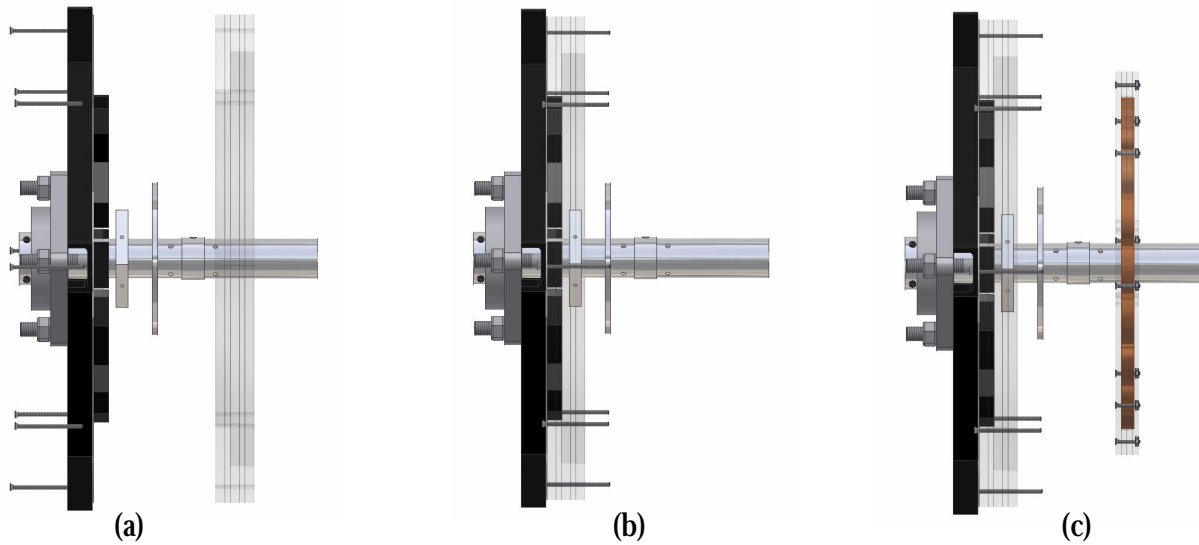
Assembled Rotor and Stator Parts on the Pipe. Using No.10-24 screws, the epoxied acrylic supports and rings should be placed on the rotor end already on the pipe (a,b). Next, the stator, comprised of the acrylic covers, supports, and rings, and coils held together with No. 8-32 screws, should be placed onto the pipe, over the collar (c).
